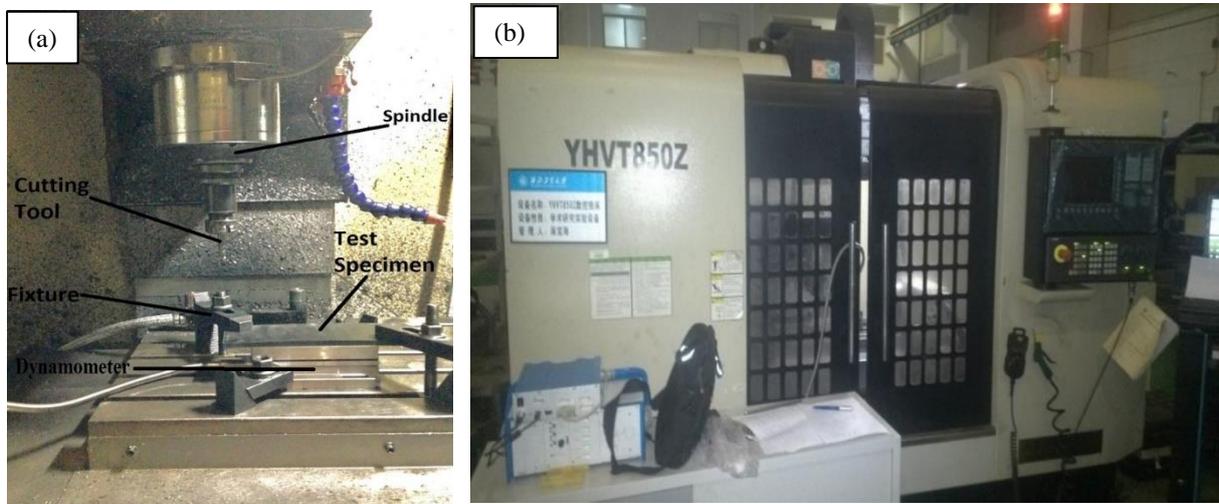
(a) Experimental Setup, (b) YHVT 850Z Milling Center
